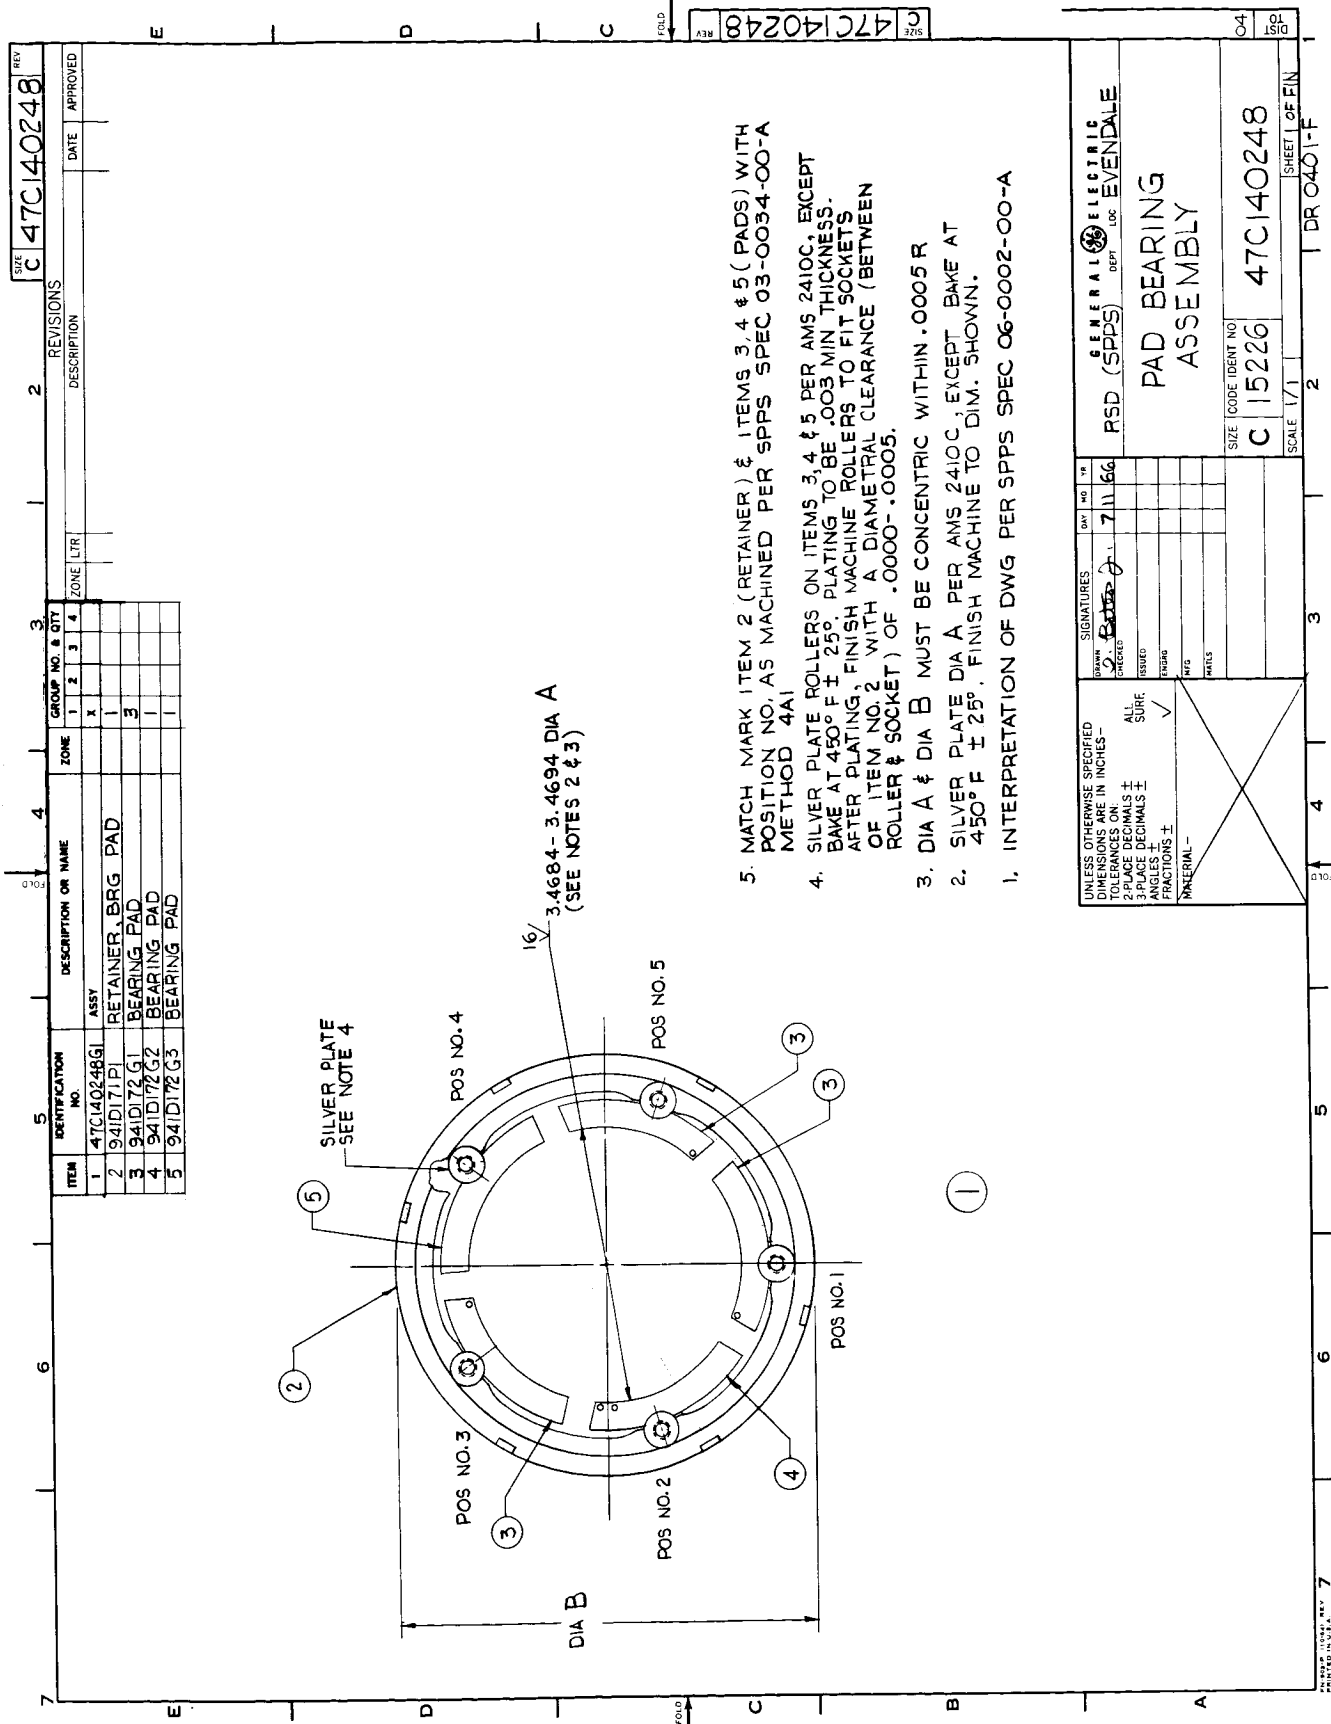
Pivoted Pad Bearing Assembly. (47C140248)
